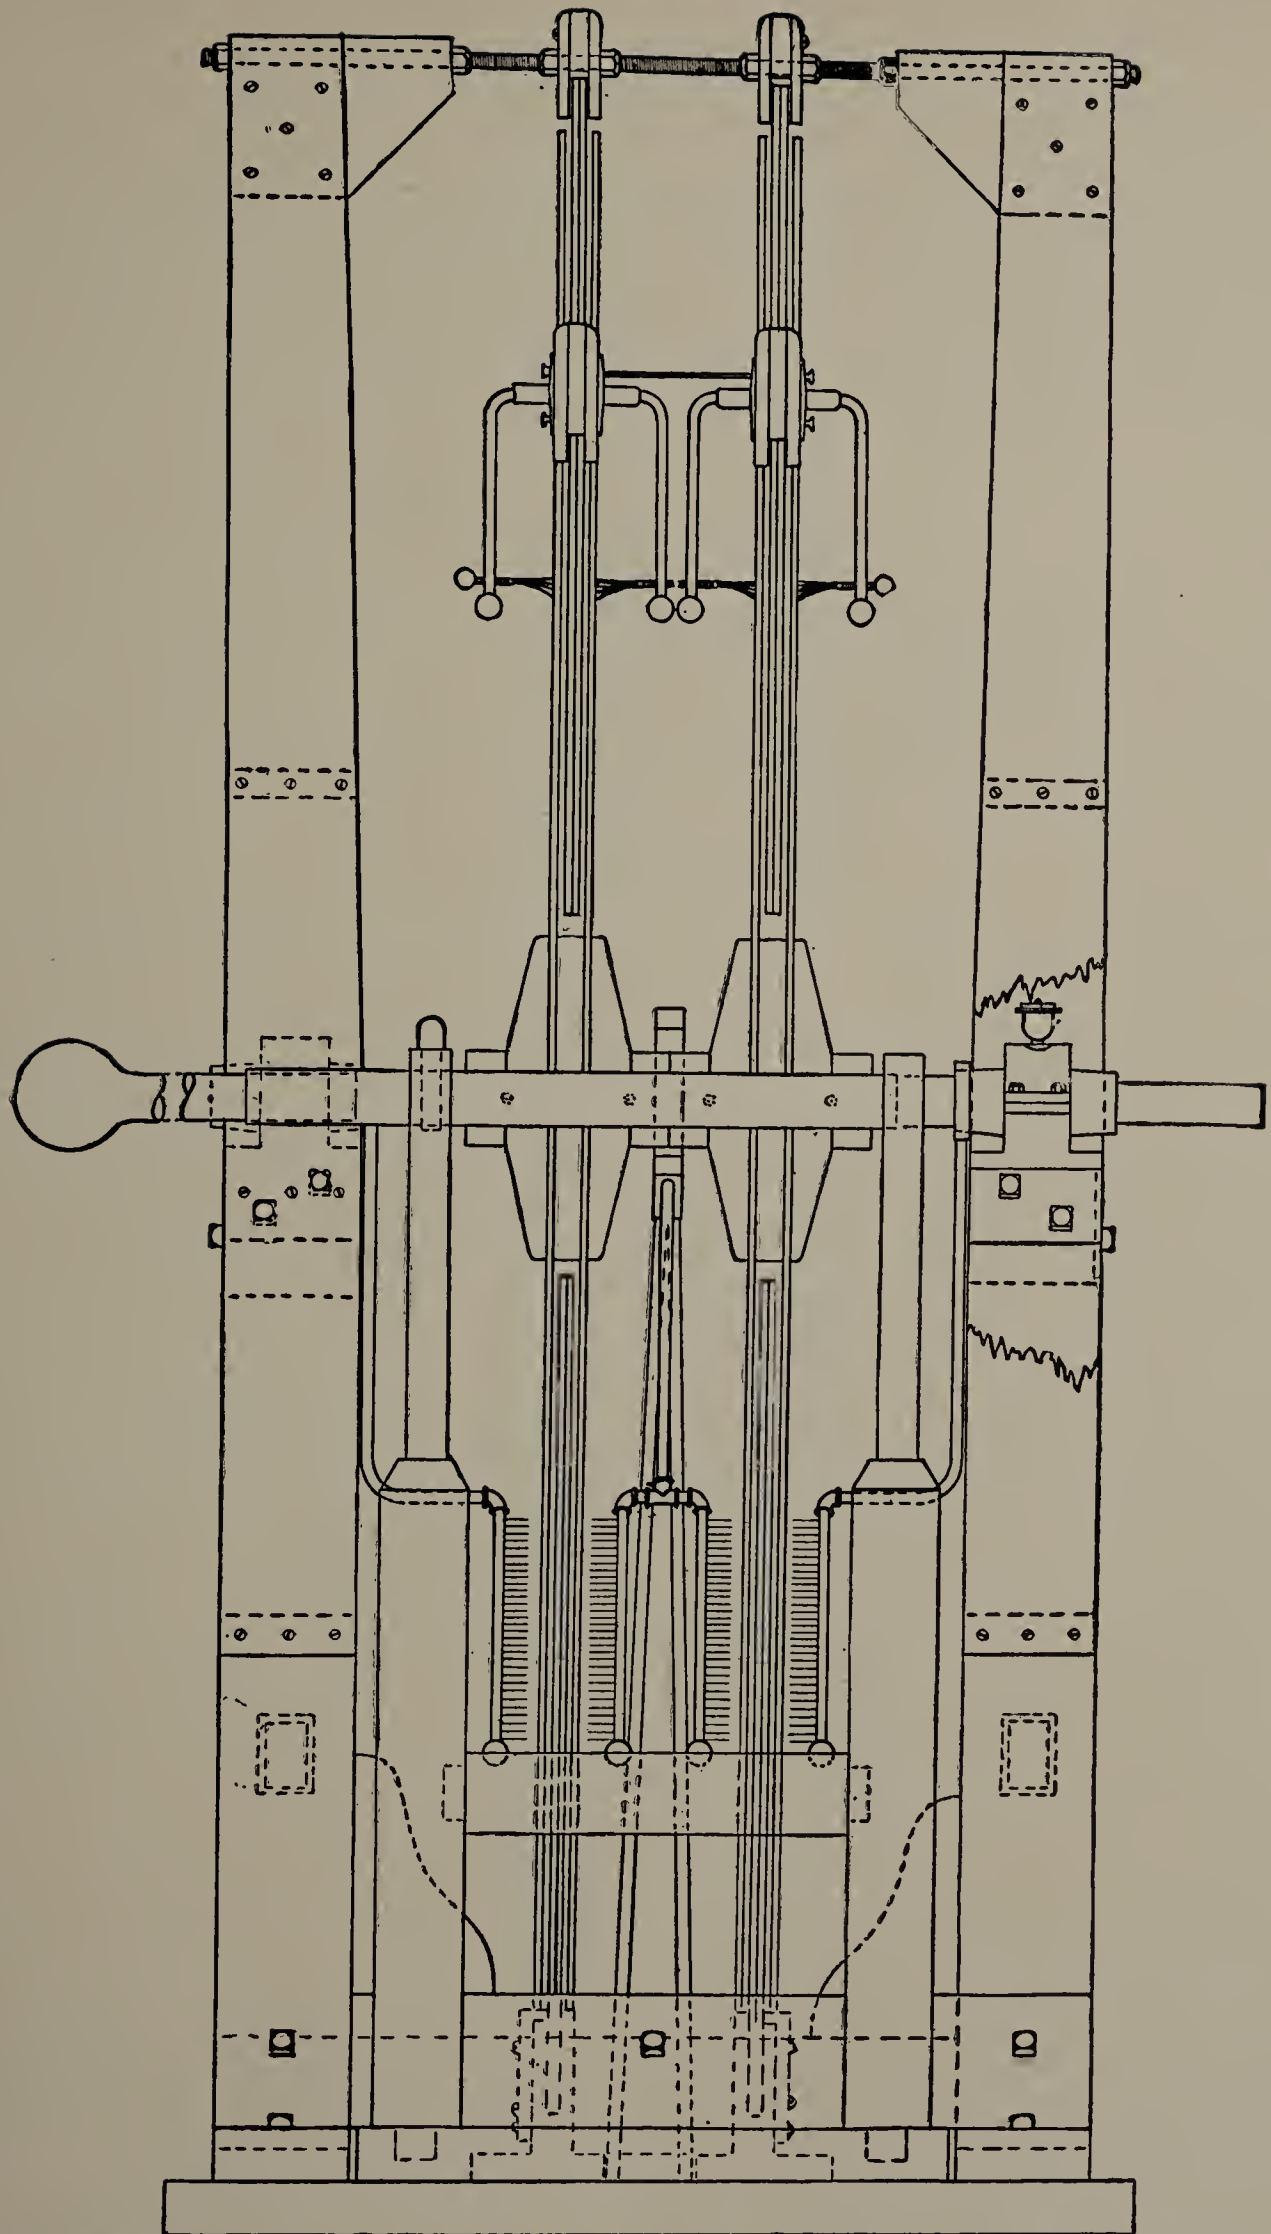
End view of static machine. Cut also shows some details of shaft and attachment of plates
